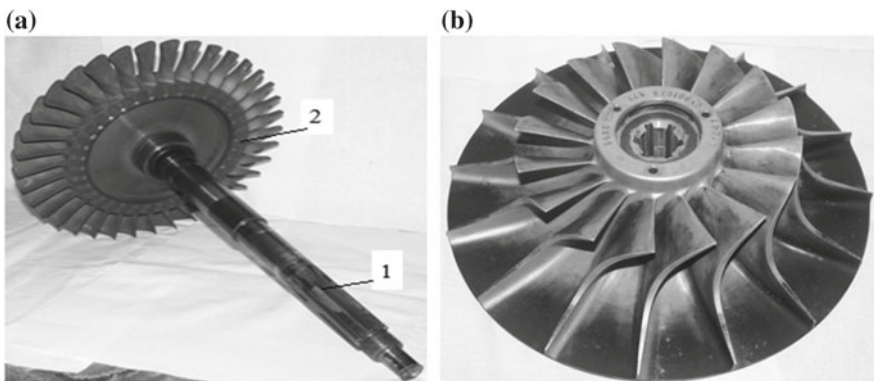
a Rotor shaft of a turbo compressor with disk 1—shaft; 2—disk with blades; b compressor impeller
